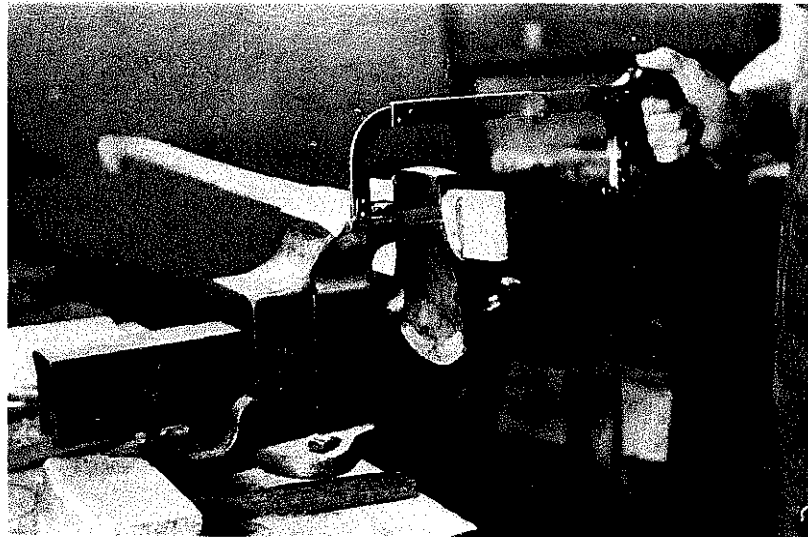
Removing the handle and wedge extending through the tool head.
